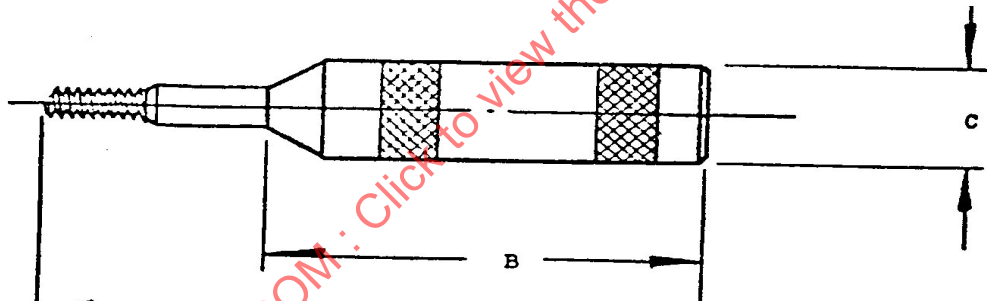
Type II, Class 2, Style a mandrel inserting tool for #2 (0.086) and #3 (0.099) unified coarse thread series
